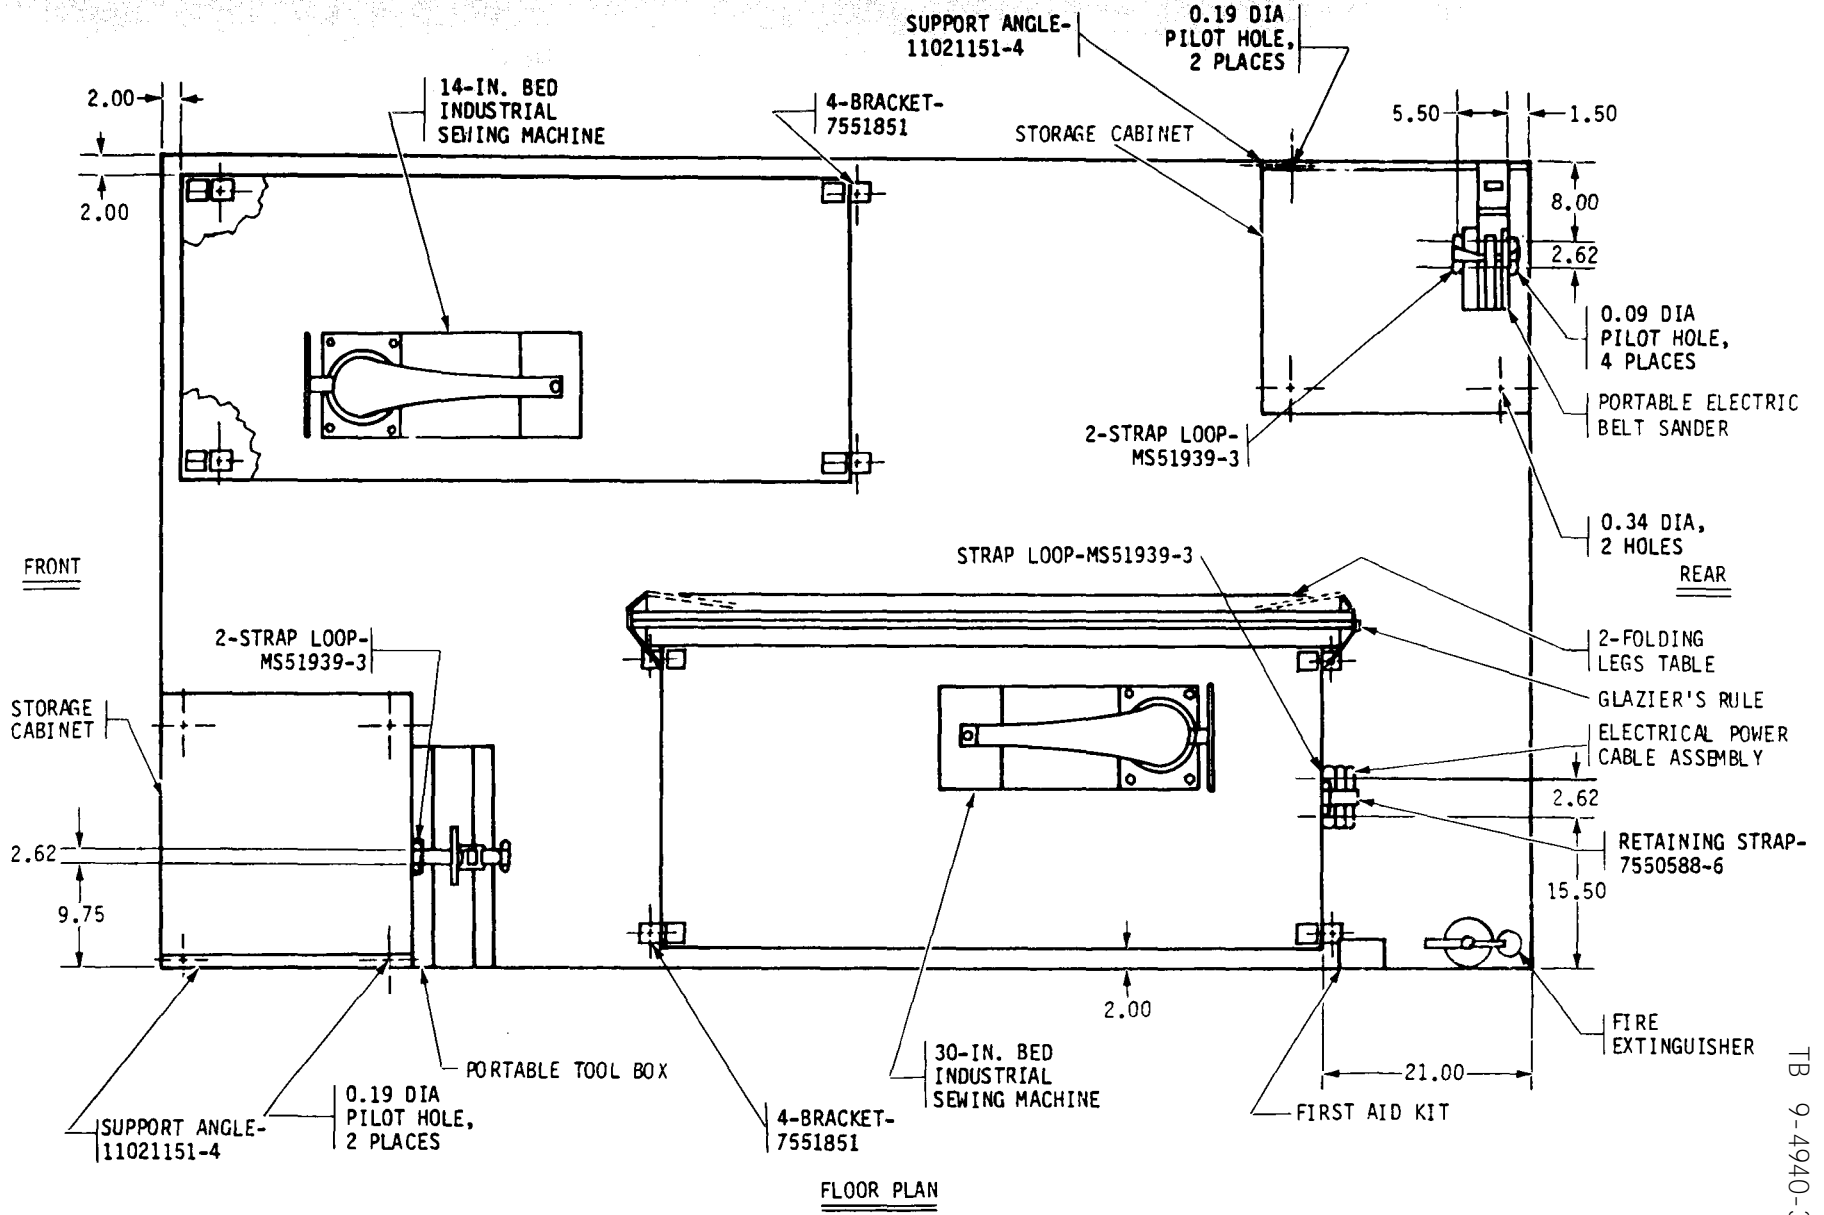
Components to be Mounted, Unit 1, 280, Floor Plan.
